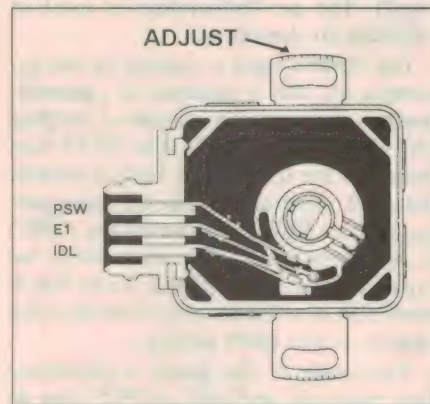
The throttle position switch is adjusted by loosening its mounting bolts and rotating the body.
